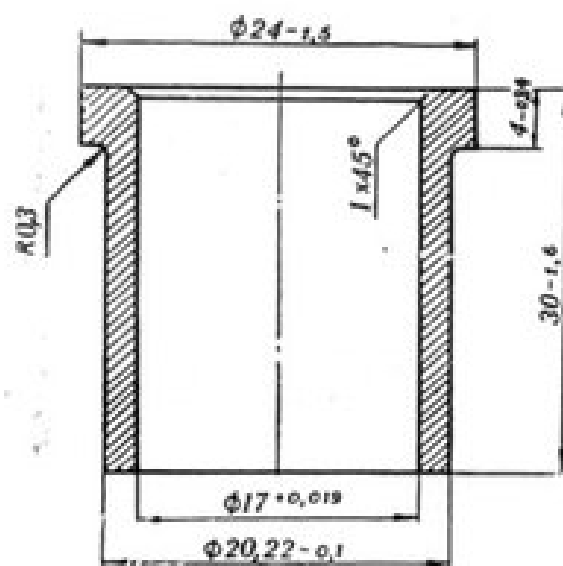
Mainshaft bush, HЖ-П-3 motorcycle.
